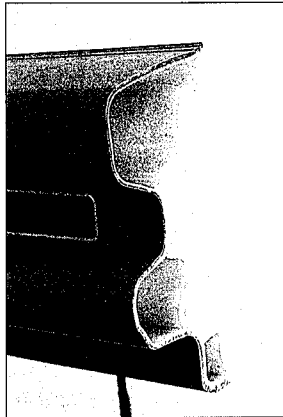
Cross-sectional view of prototype bumper (section I in Fig. 7)
